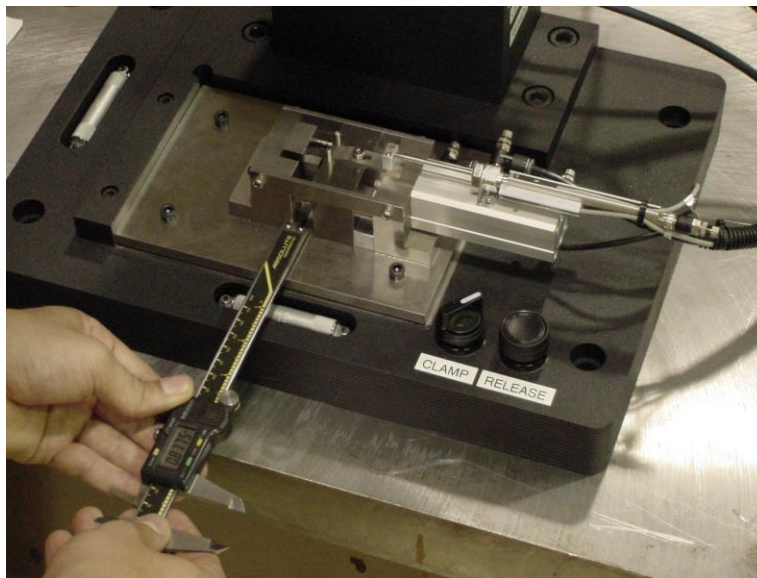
These digital calipers are being used to measure the depth from the front face of the Izod fixture to the calibration block.
